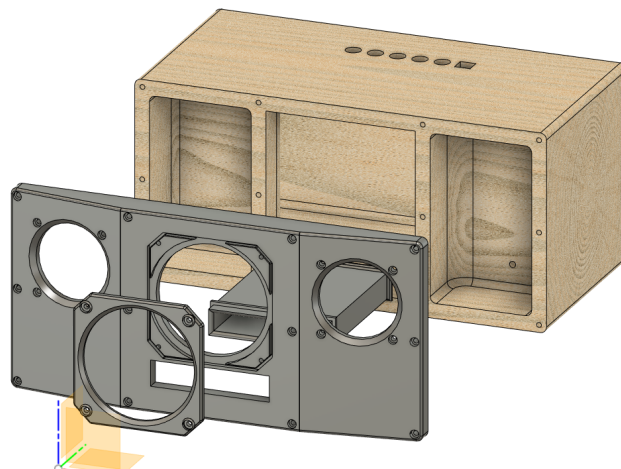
Enclosure's front panel and tube assembled in it (behind)
